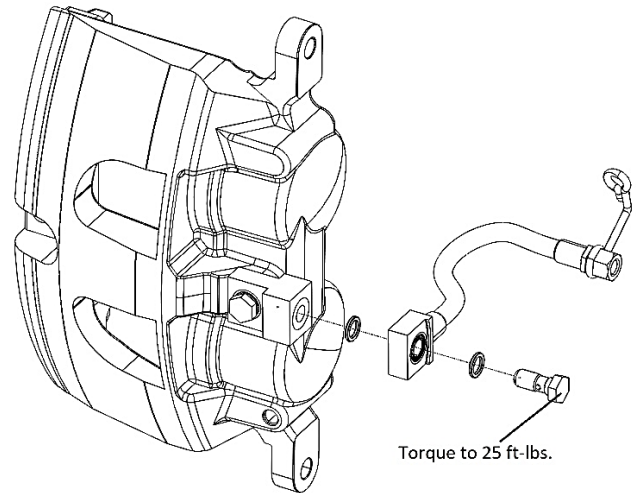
Installation of Driver Side OEM Brake Line to Relocation Block
